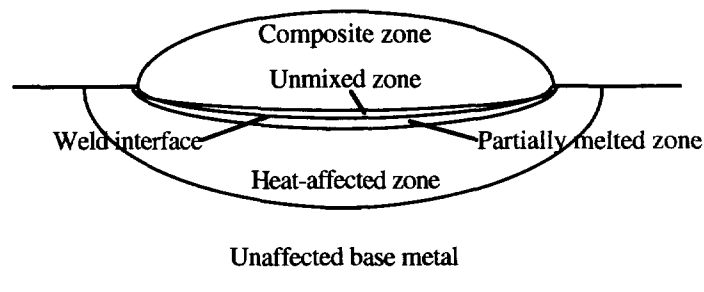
Metallurgical Zones in a Typical Weld.
